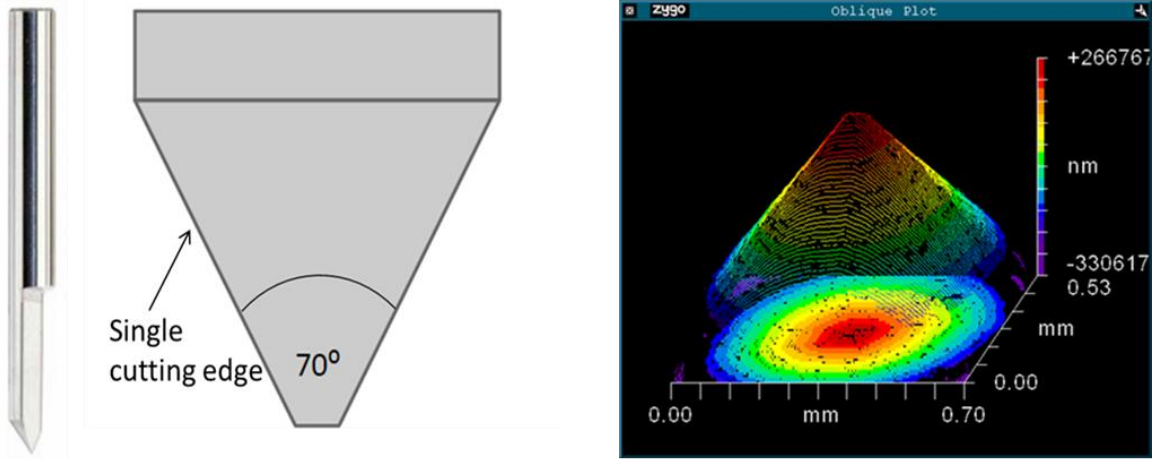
The surface profile of the cone using the angled cutting tool was much smoother and consistent than the layered cake method.
